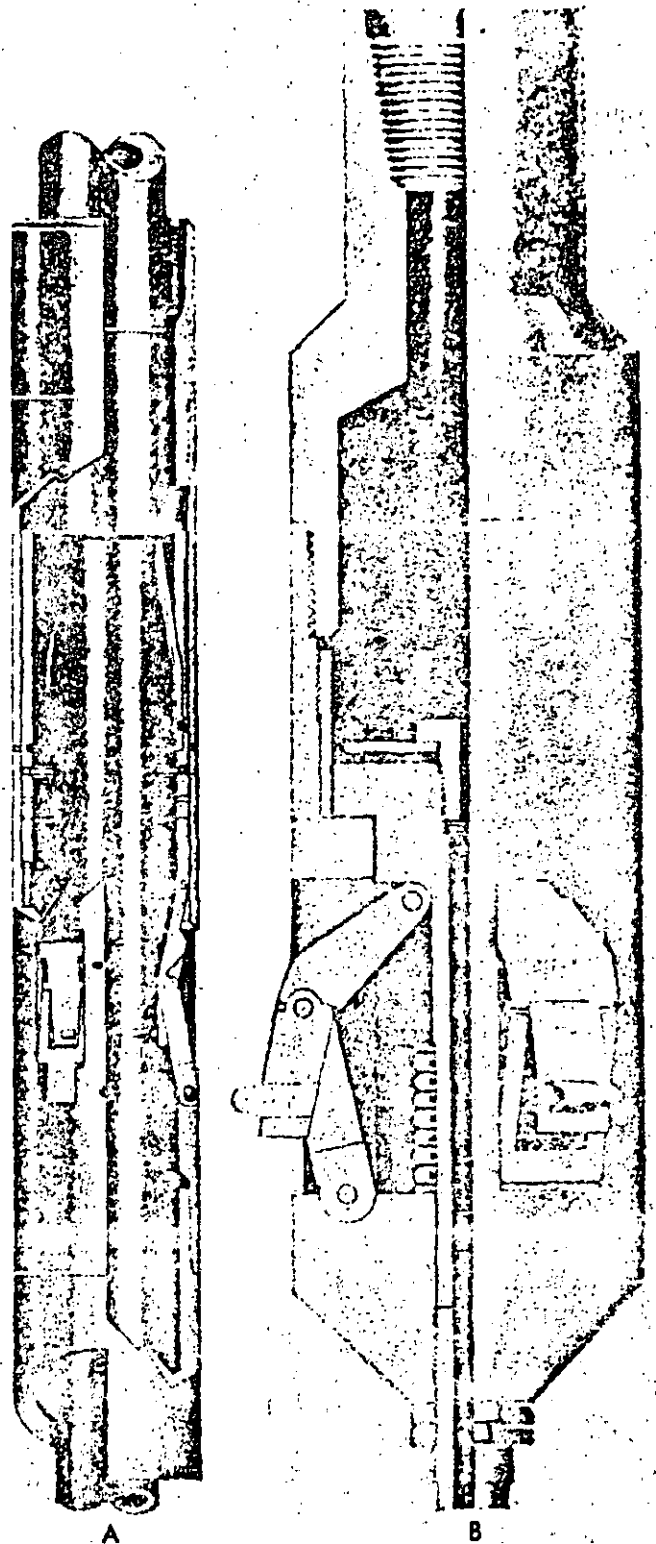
A, outside mechanical cutter; B, inside cutter.
